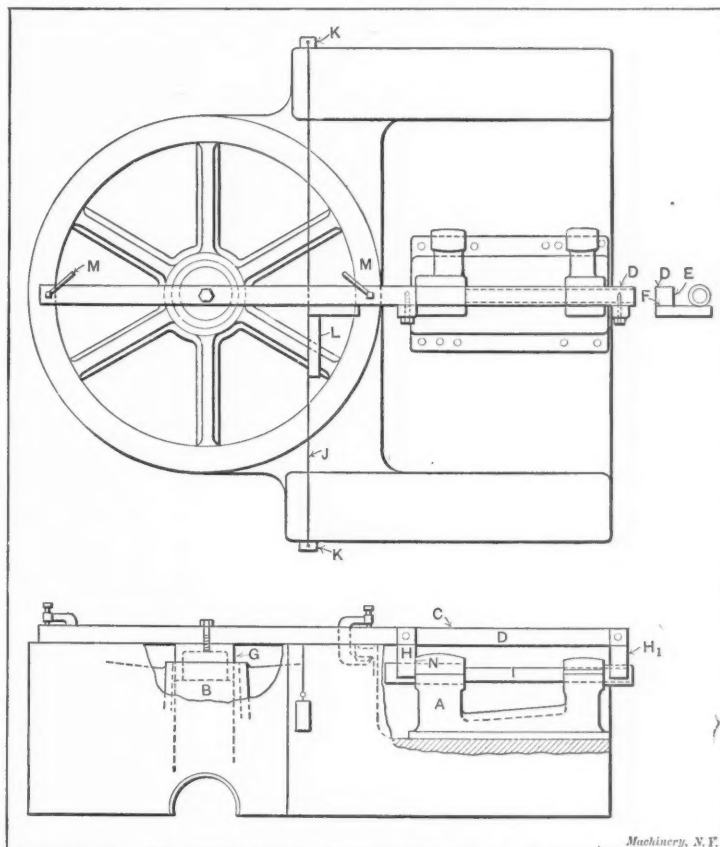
Gage for Aligning the Driving Shaft Bracket on a Vertical Boring Mill of the Bevel Gear Driven Type
